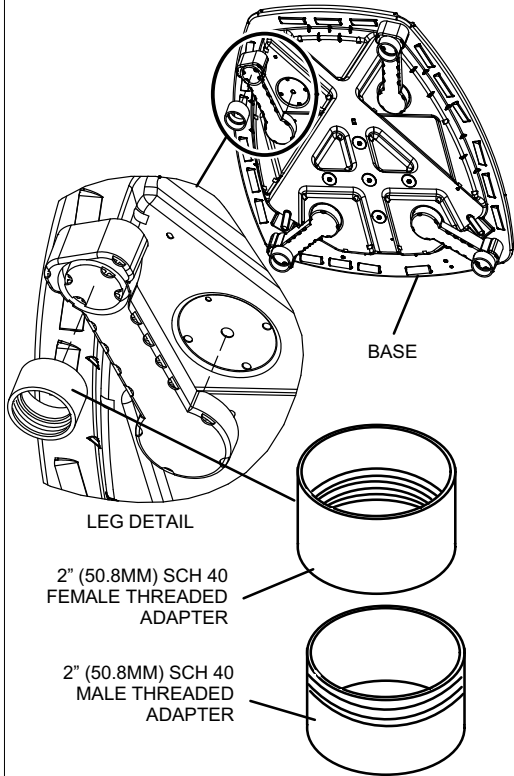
Placement, Slab Mounting and Stabilizing Unit
